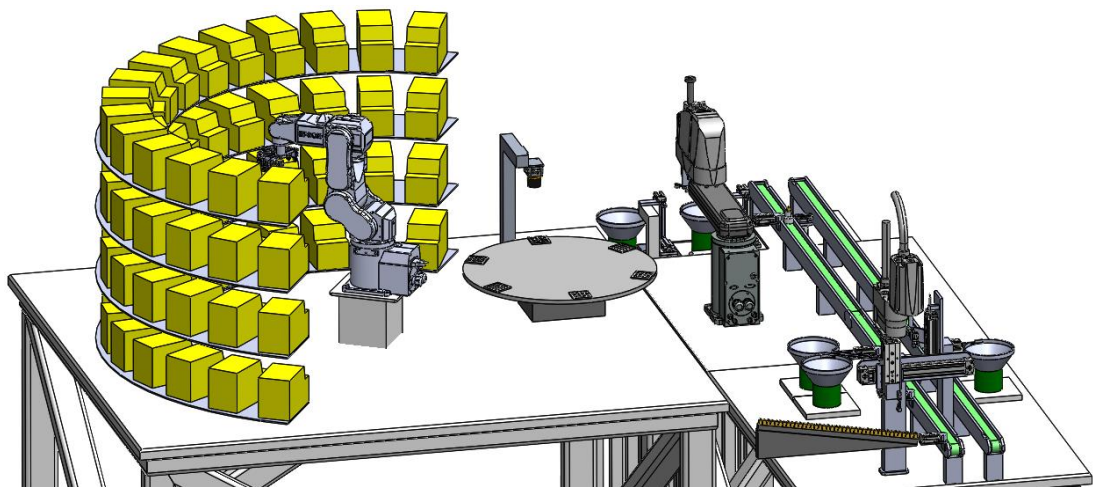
Proposed assembly machine combination of “mechanical feeders on shelves” and “one robot with a packet jig in gripper.”
